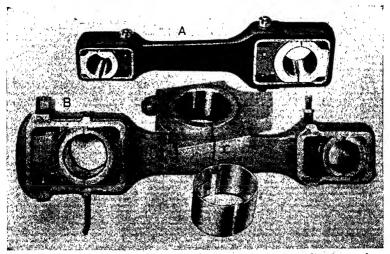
,-Typical connecting rods with both inner and outer adjusting wedges.
